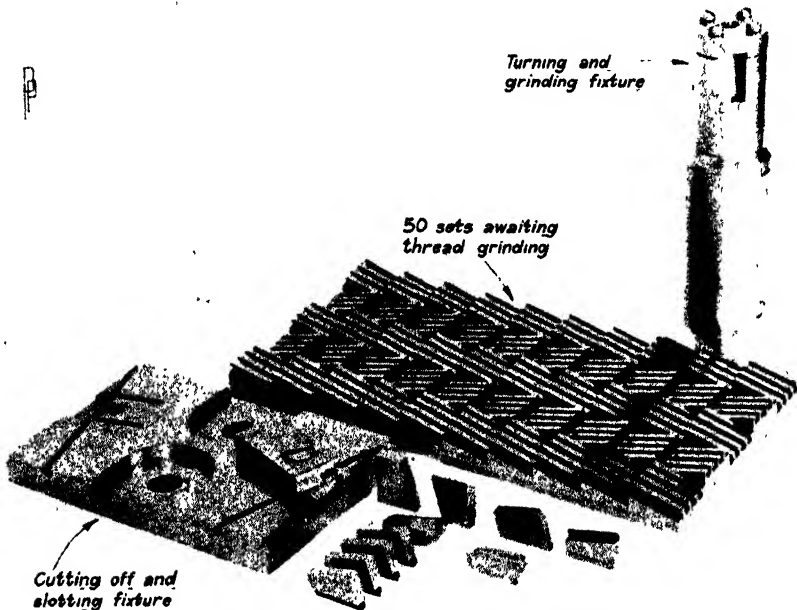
Fixtures for Landis tap-chasers and a group of completed chasers.
